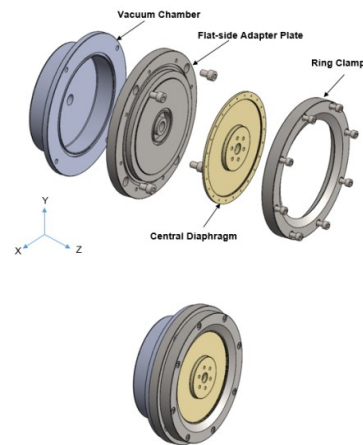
CAD model of vacuum fixture assembly showing exploded and assembled views
